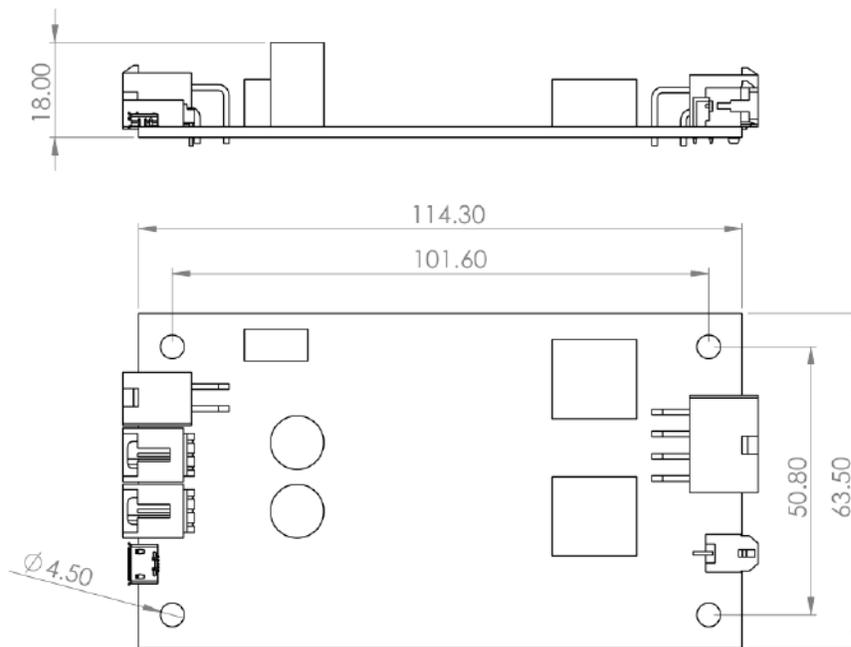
Top and side view of open frame driver, highlighting mechanical dimensions
